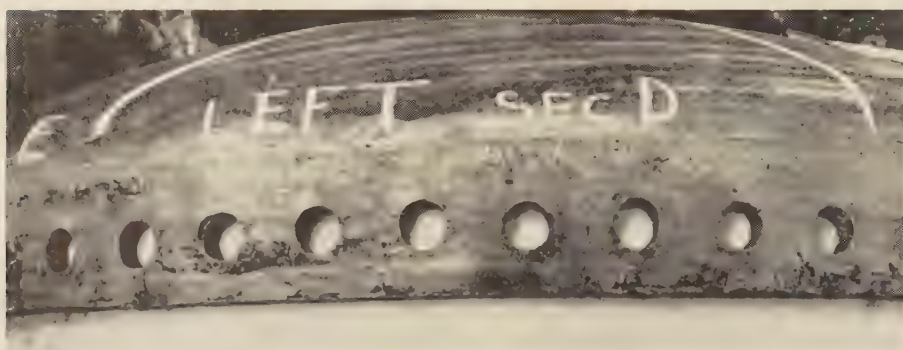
FAILED METAL IN A BOILER-DRUM-HEAD SEAM
